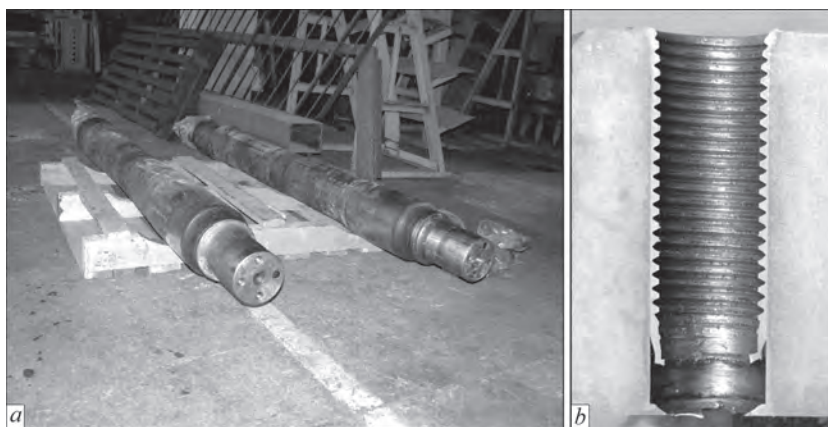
Repair of threaded holes by means of explosive welding: *a* — general appearance of wheel pair axle with four threaded holes; *b* — macrosection of threaded hole restored by explosion
